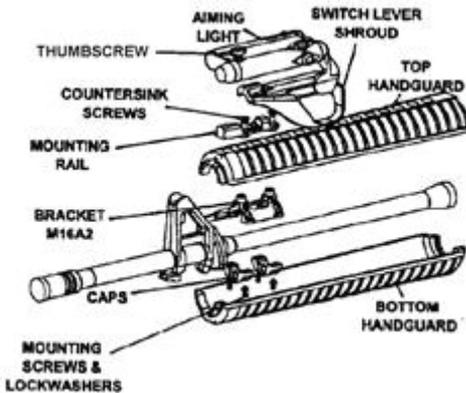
M16A2/M4 mounting bracket
